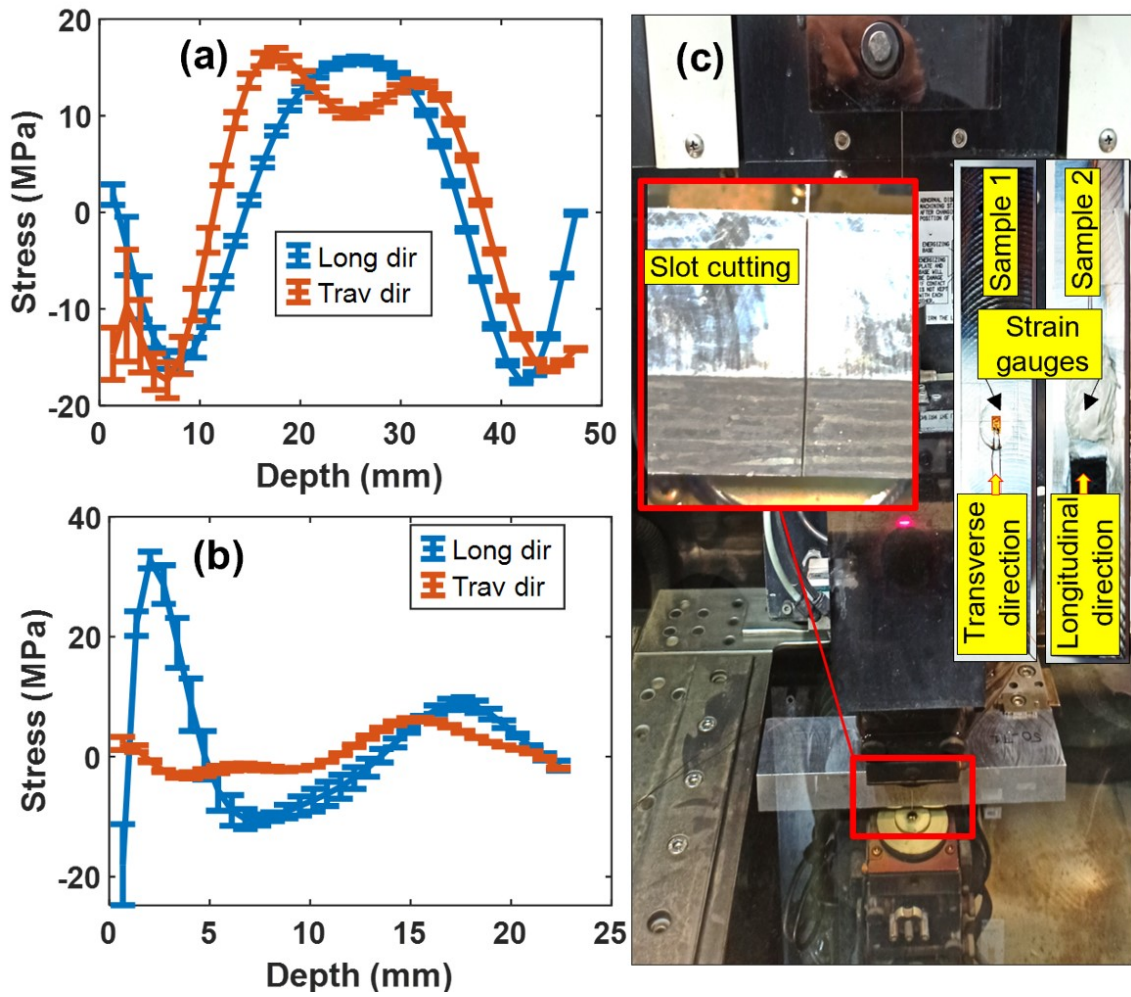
IBRS measurement setup and results for (a) stock plate 50 mm thick (b) machined workpiece blank 23 mm thick (c) Experimental setup for WEDM.
